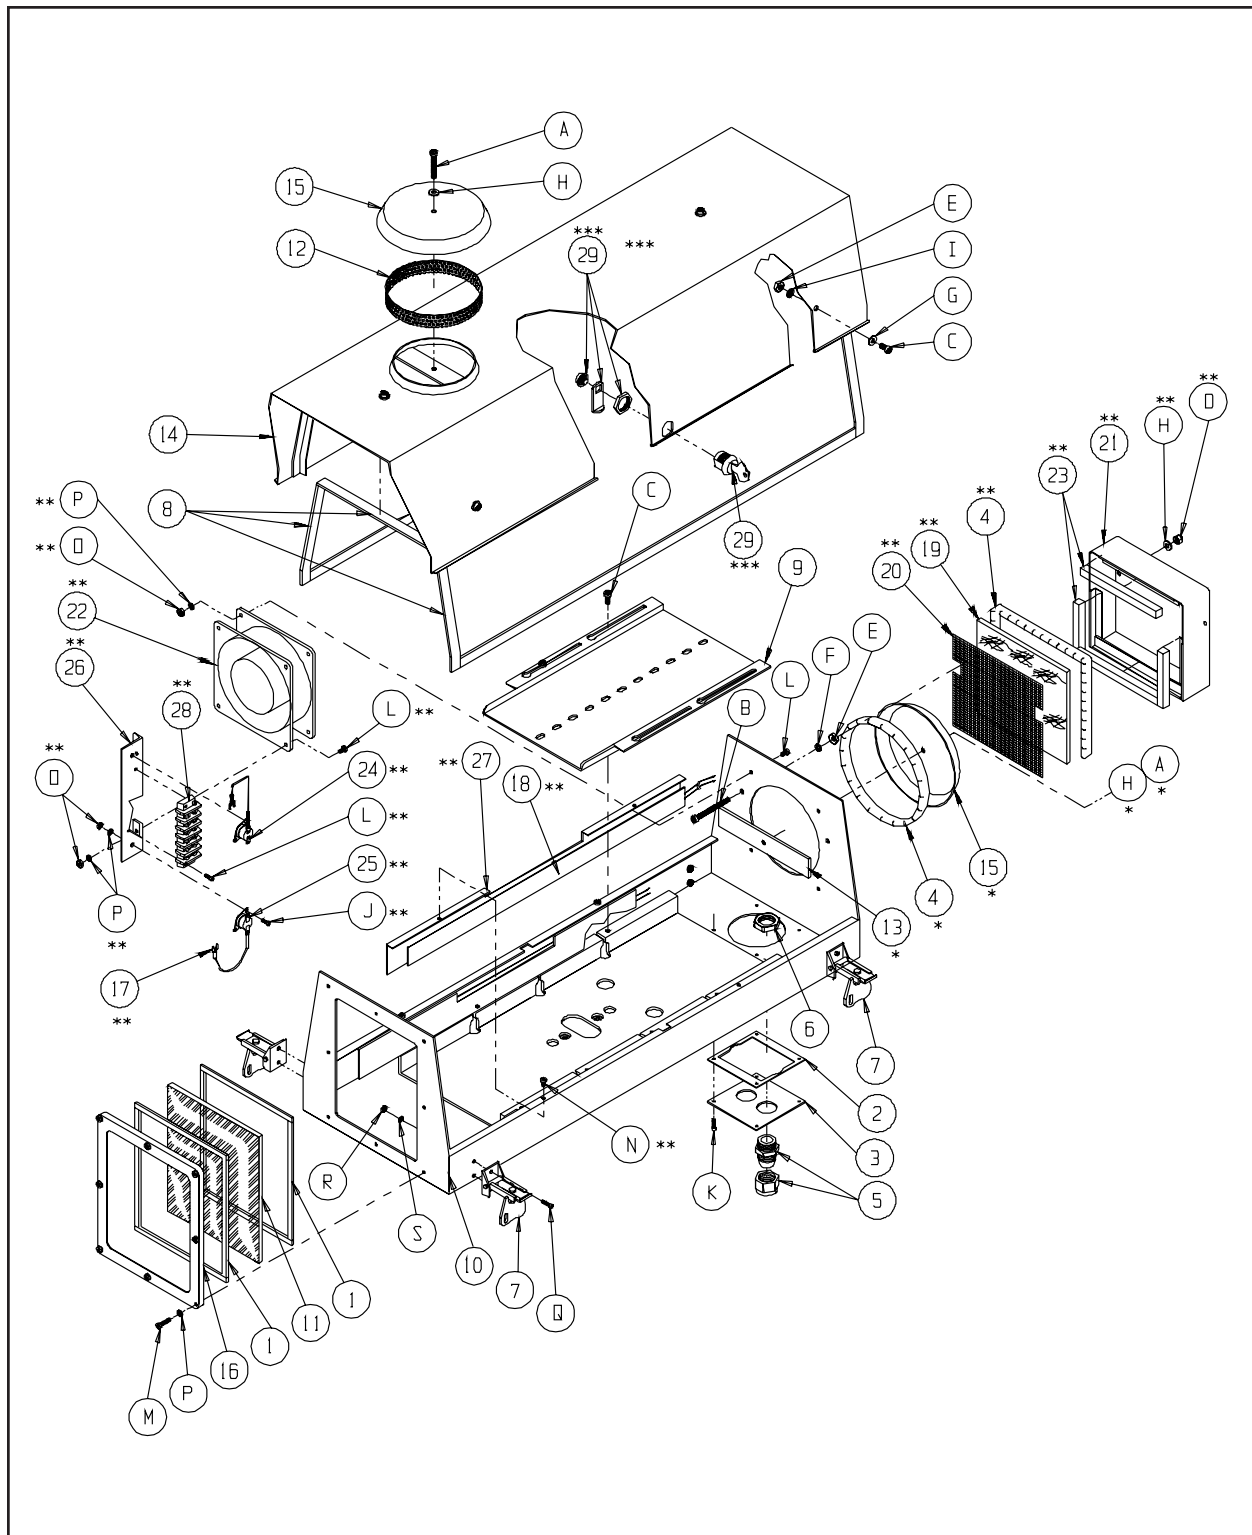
EH66 Enclosure Exploded Assembly Diagram
